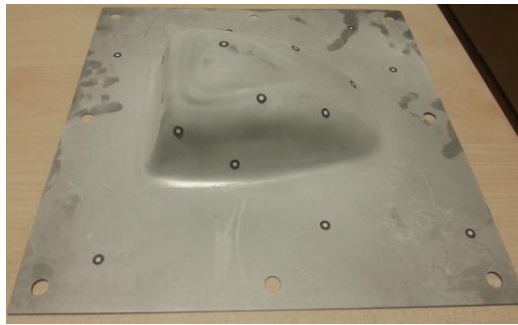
The manufactured part with a defect due to initial geometry of the tool path.
